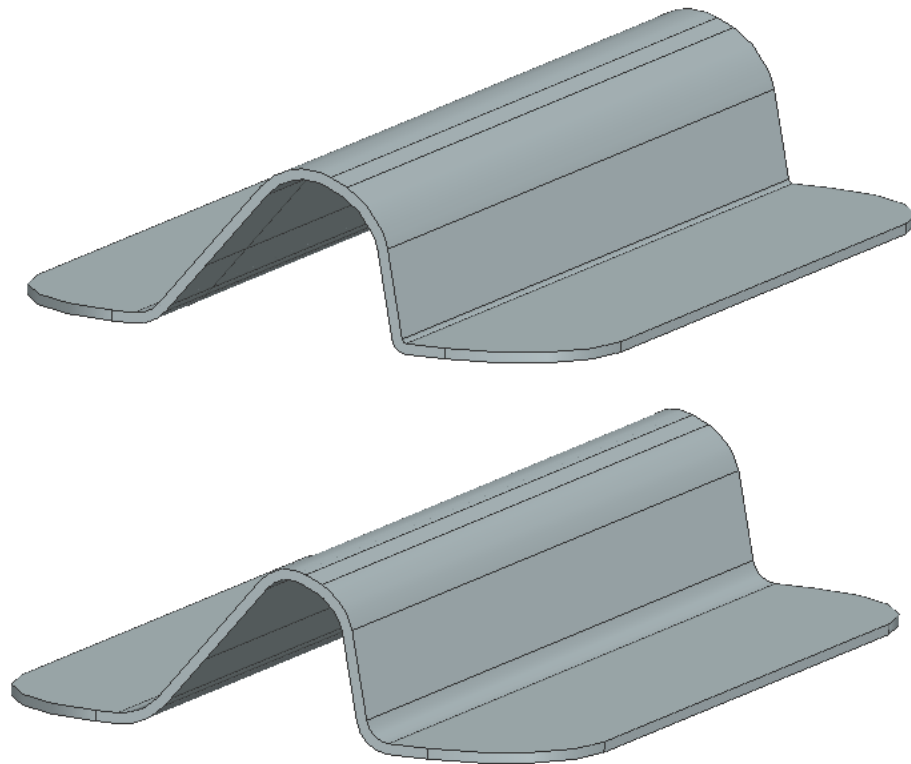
CAD drawing of the male and female mold of shell-like tool for Scenario 3
